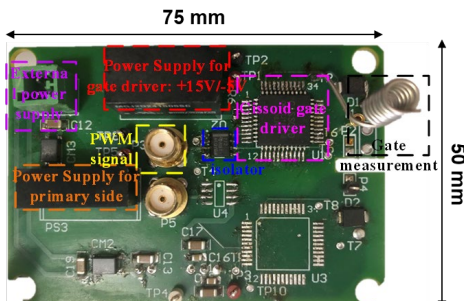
Manufactured PCB of gate driver board with gate driver from Cissoid.
